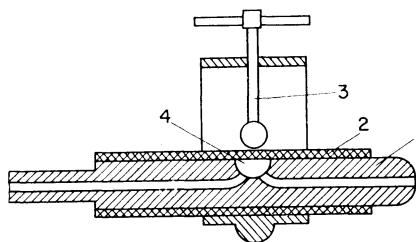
Valve, consisting of an elastomer tube on a metal plug (after Altaiskii²³)
